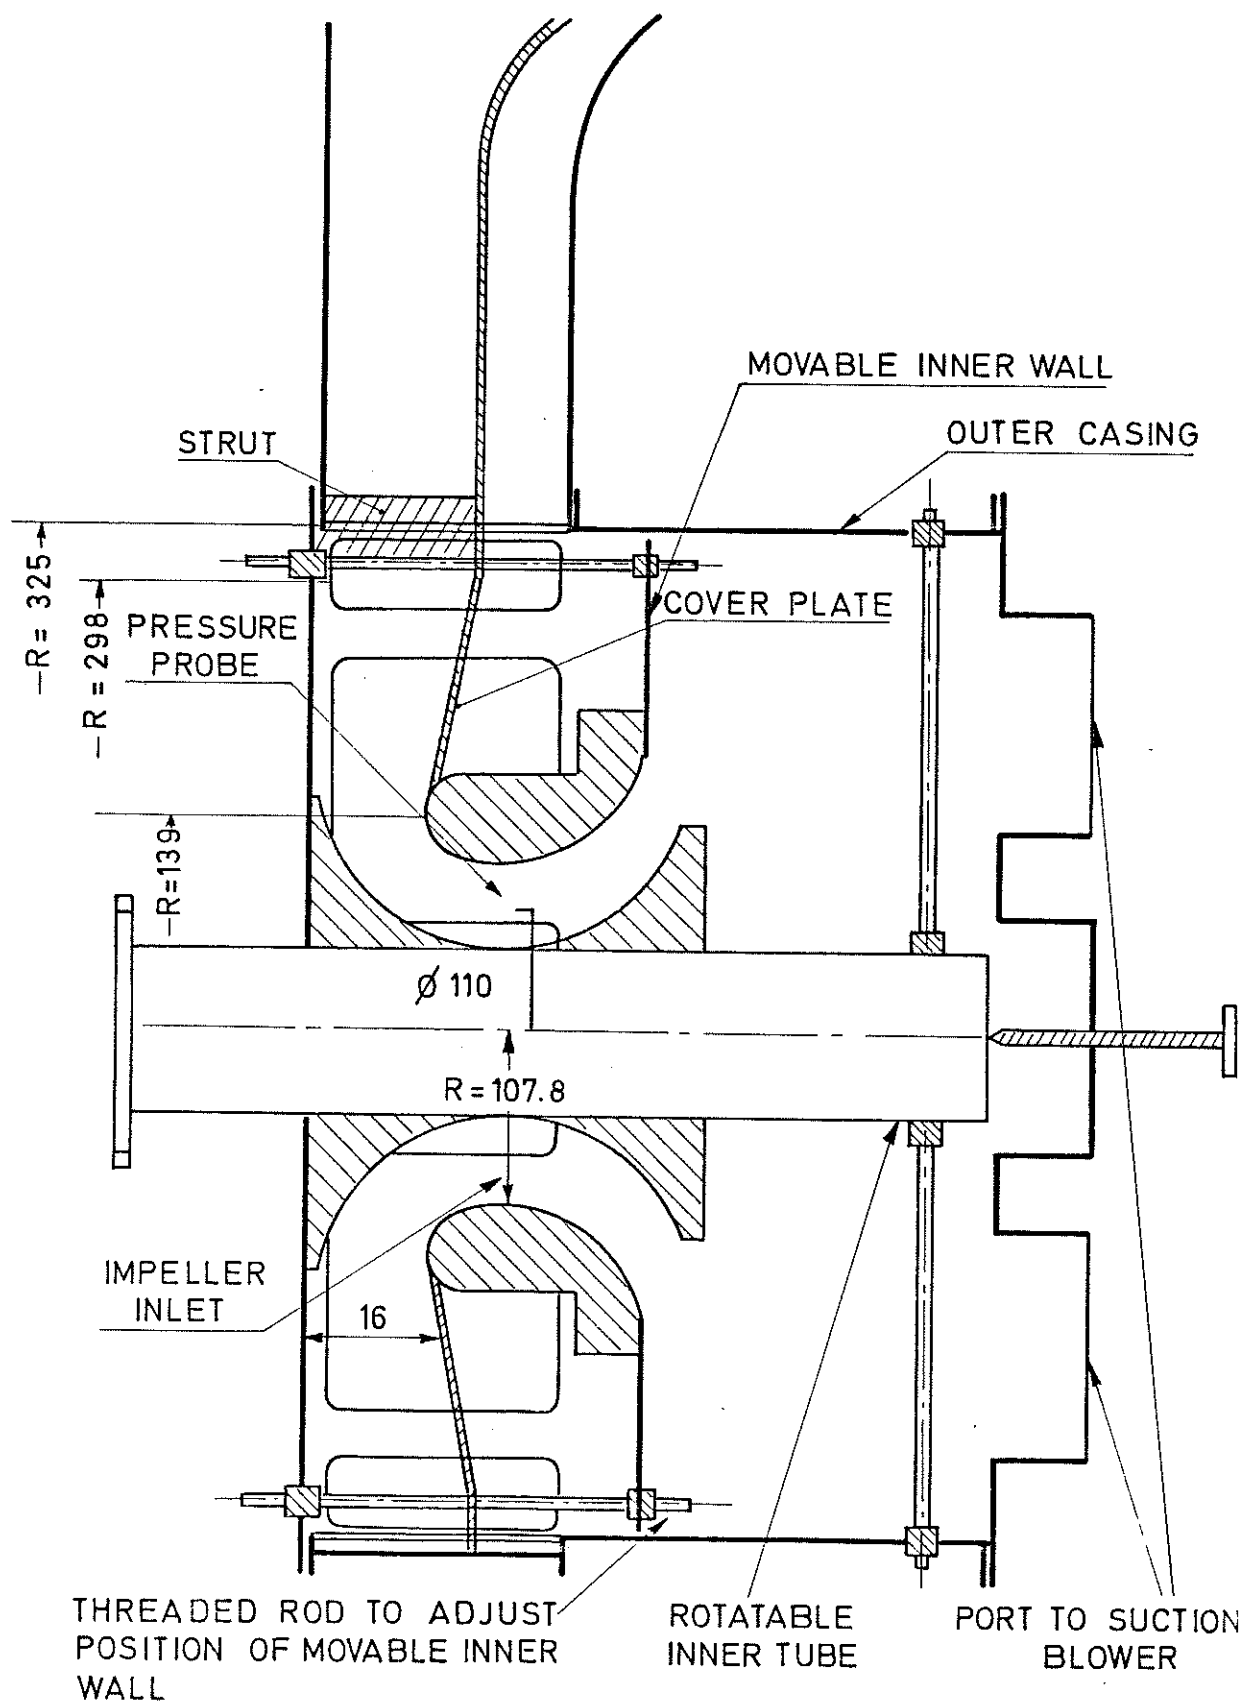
COMPRESSOR INLET SECTION MODIFICATION FOR DESIGNS J AND K.
